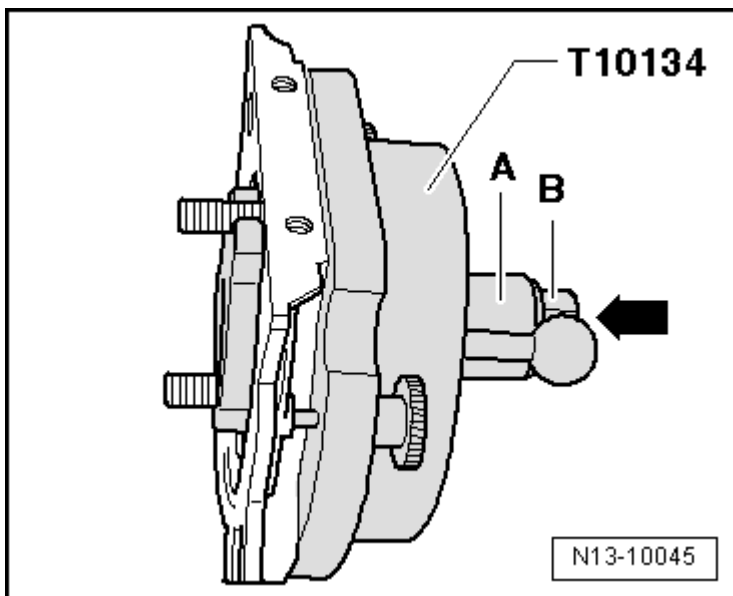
Identifying Threaded Spindle Pressed Of Assembly Tool T10134 Until Nut Rests On Assembly Bell
